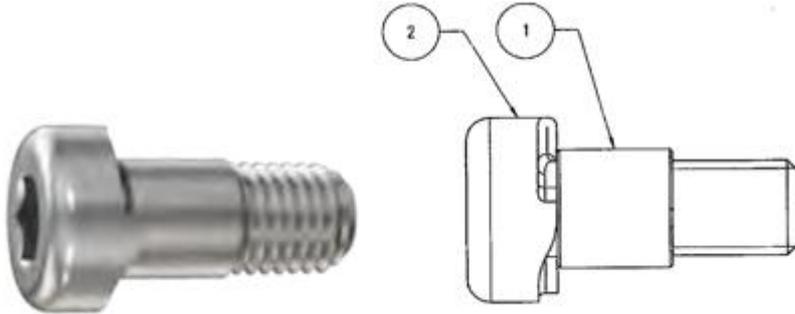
Image of the plateau screw (left); technical drawing of the plateau screw (right): component 2 – screw, component 1 – bushing
